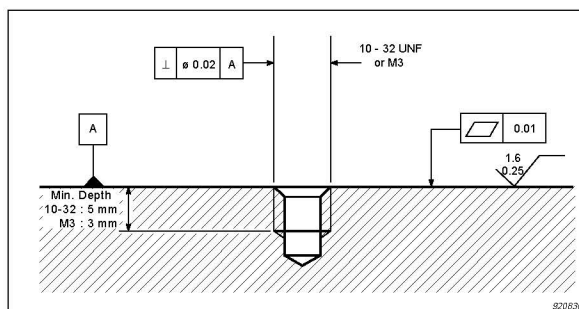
Recommended tolerances for the mounting surfaces. Dimensions and symbols in accordance with ISO 1101
